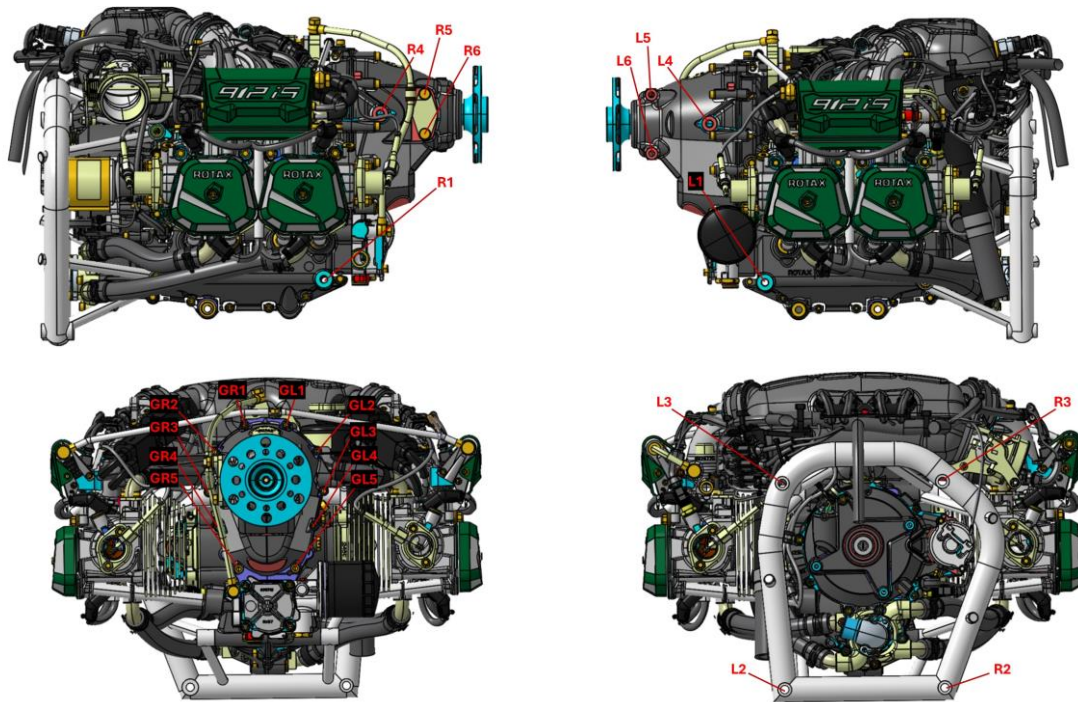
Left, Right, Back and Front View Rotax 912iS Attachment Points
